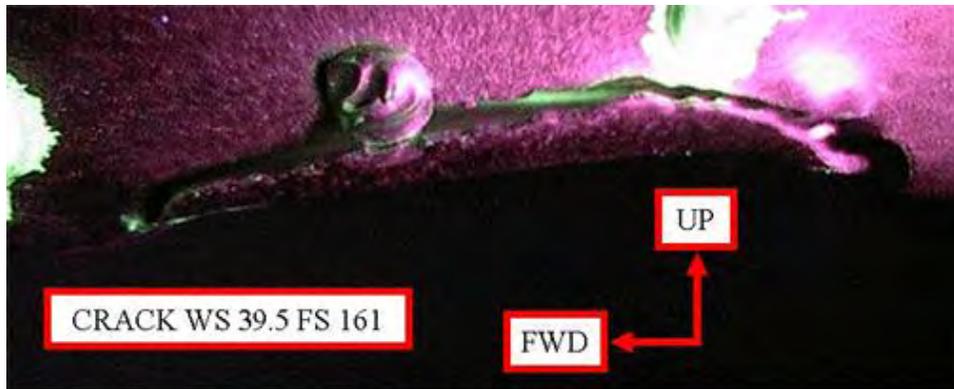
Location of Crack on the Left Wing Rib Assembly WS 39.5 FS 161
